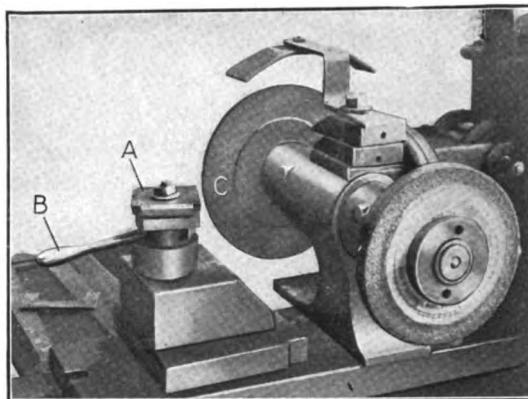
CORNER-ROUNDING FIXTURE FOR SHELL CUTTERS
